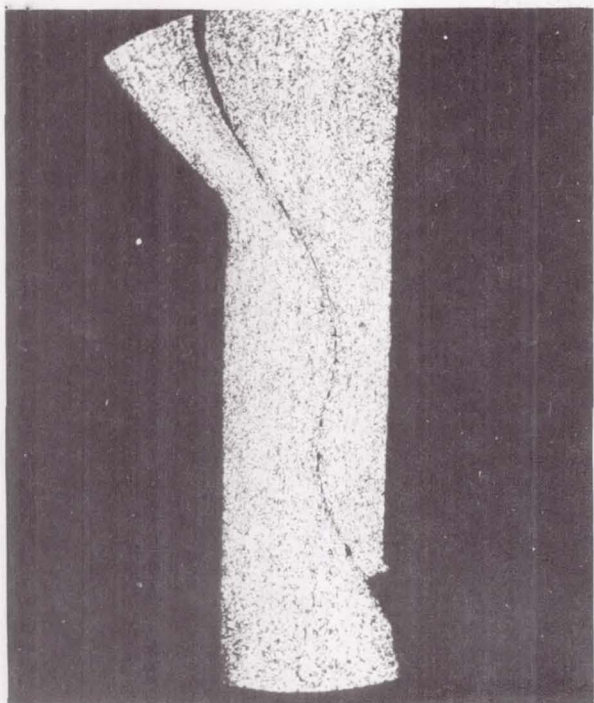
Higher Magnification of Weld Shown in Figure 10
